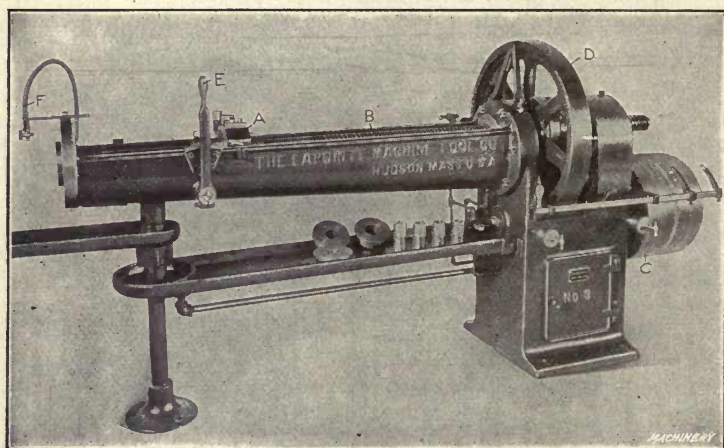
Broaching Machine made by the Lapointe Machine Tool Co.
